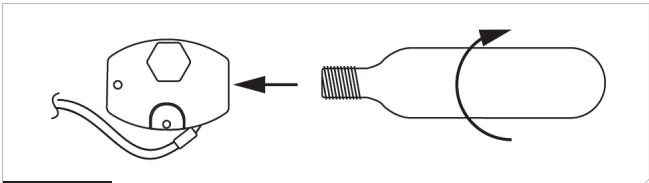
MD3072 E1 - INSTALL CYLINDER
